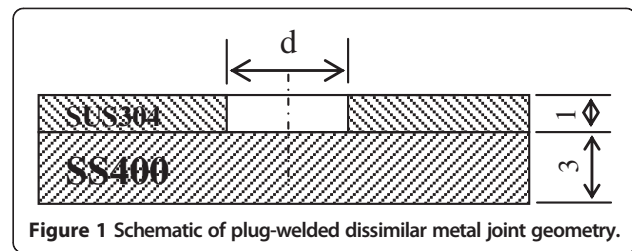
Schematic of plug-welded dissimilar metal joint geometry.
